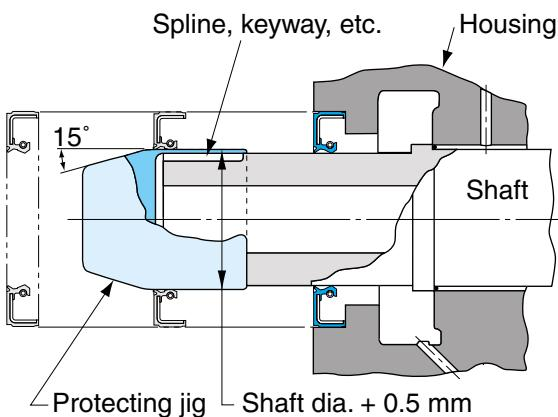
Seal protecting jig for spline, keyway, holes on shaft
